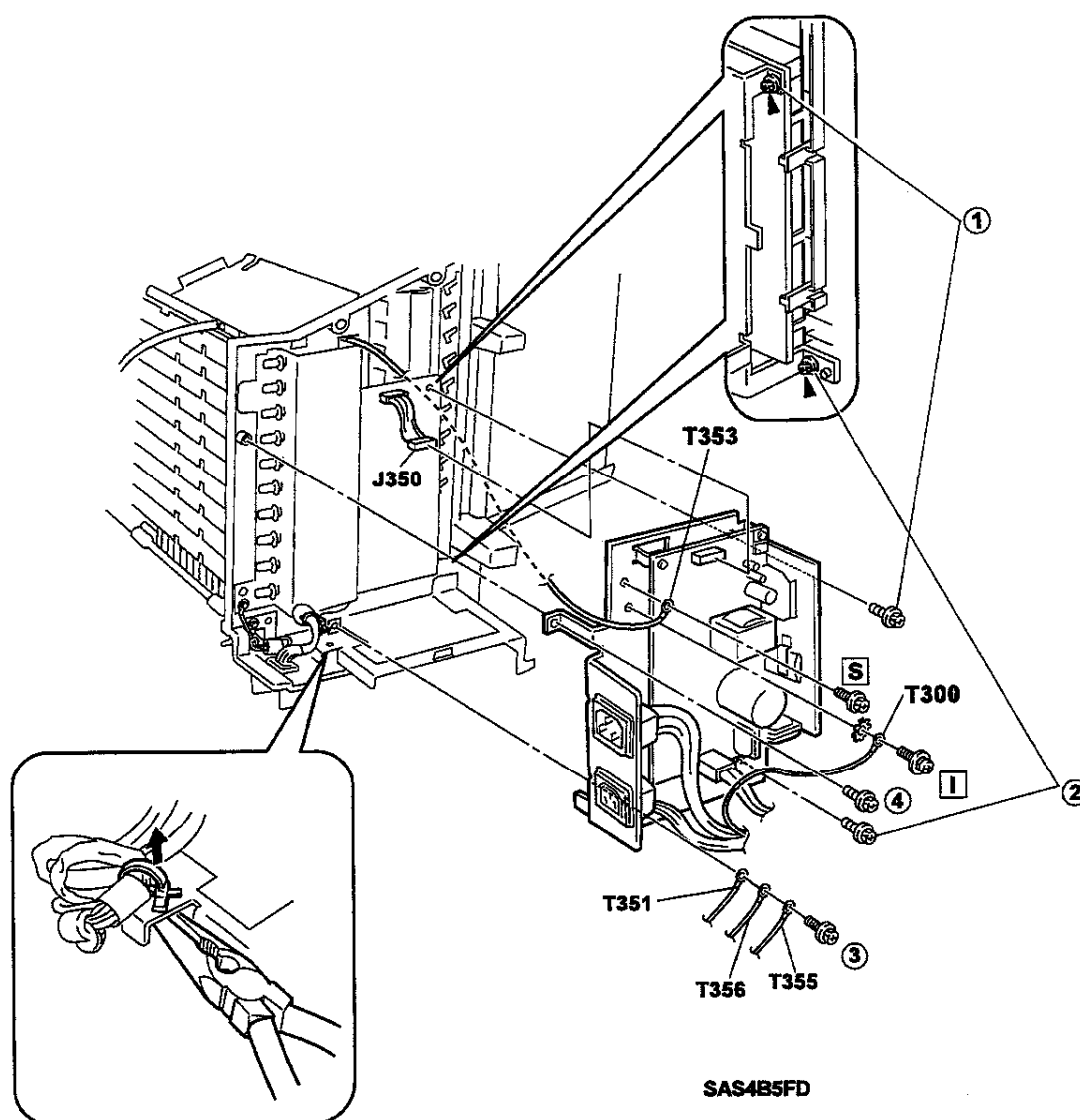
Removing the LVPS Frame Assembly
